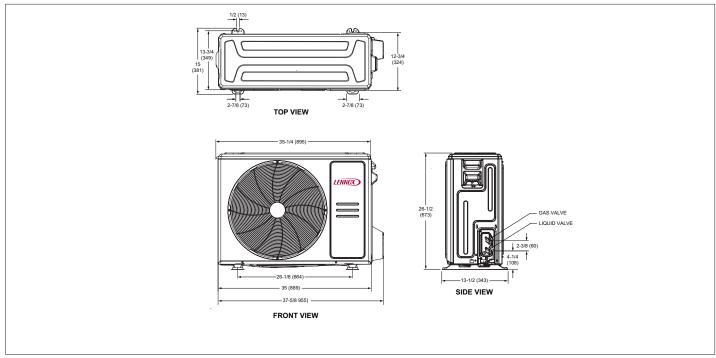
MLB018S4S Outdoor Unit Dimensions - Inches (mm)
